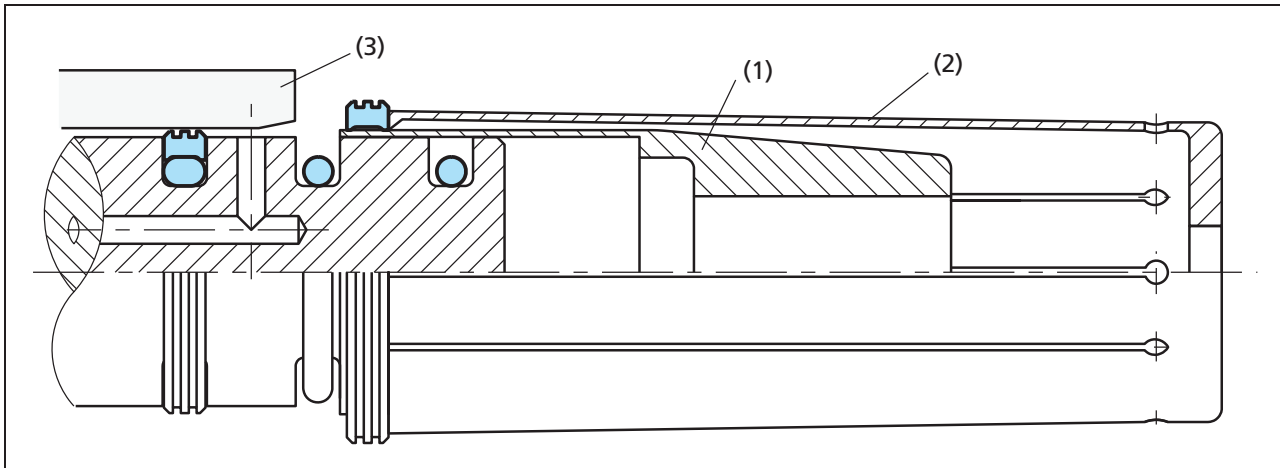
Expanding the Turcon® Roto Glyd Ring® over the installation sleeve using an expanding sleeve
